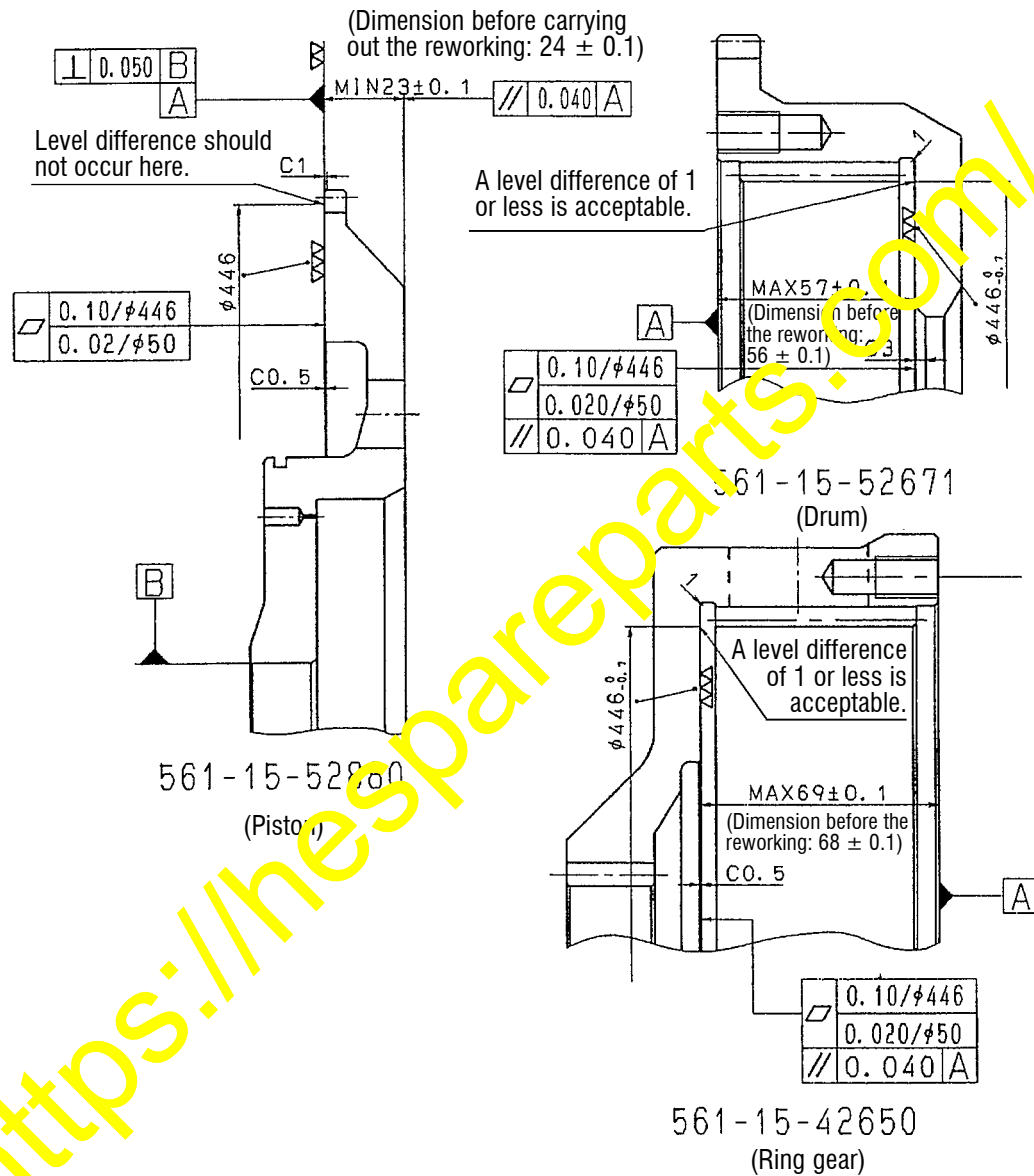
Detailed reworking drawing for the ring gear, piston and drum
